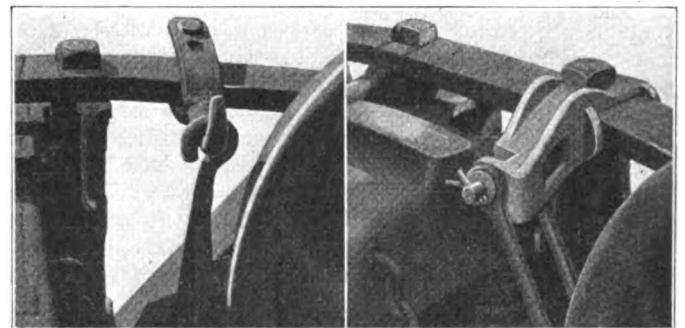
Temporary repairs in case of broken brake hanger bracket (left) and permanent repairs (right) by means of Universal truck column with integral brake hanger bracket
